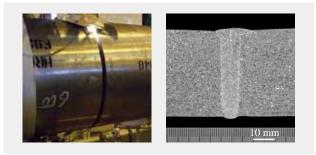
Boiler Welding. Testing involving narrow-groove HST [hotwire switching TIG (tungsten inert gas)] welding of HR6W Ni alloy has demonstrated the integrity of the welds.
